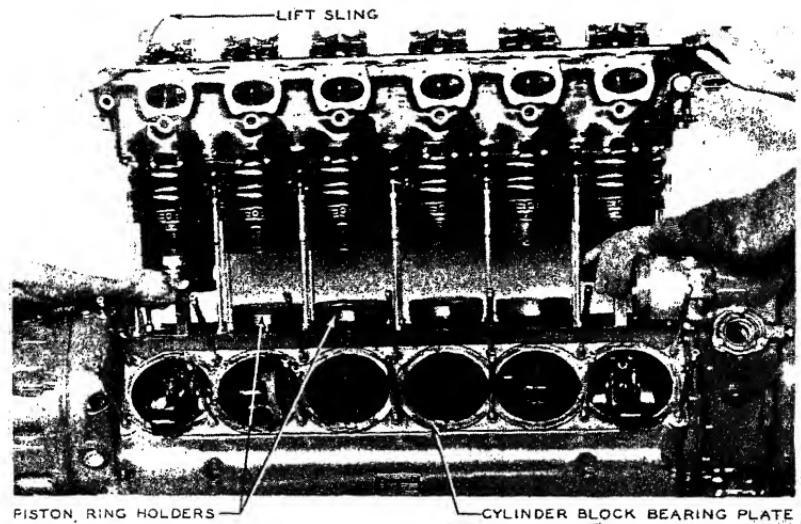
Lowering right-hand cylinder block on crankcase. This takes three men.
